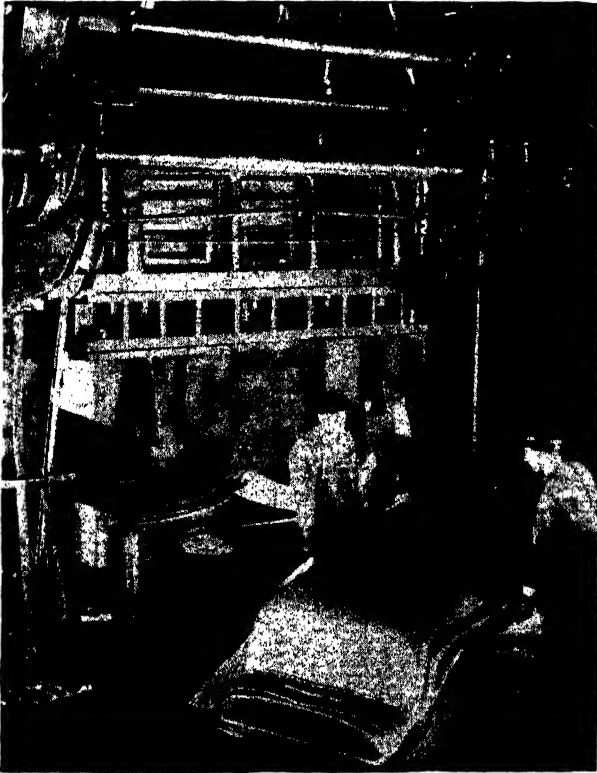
Turret top for an automobile, which is among the largest thin-gage stampings produced and which involves deep drawing in the die shown in the background.
